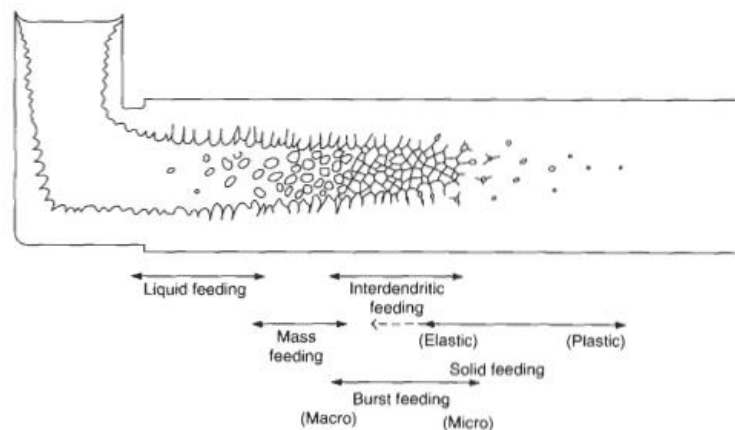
Feeding mechanisms in a solidifying casting [1].
